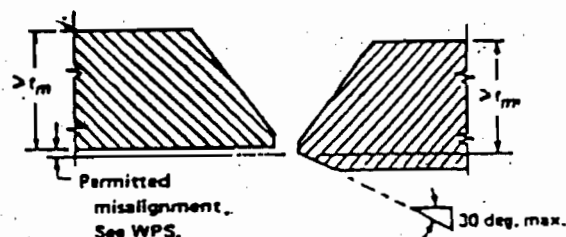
TYPICAL BUTT WELD END PREPARATION
